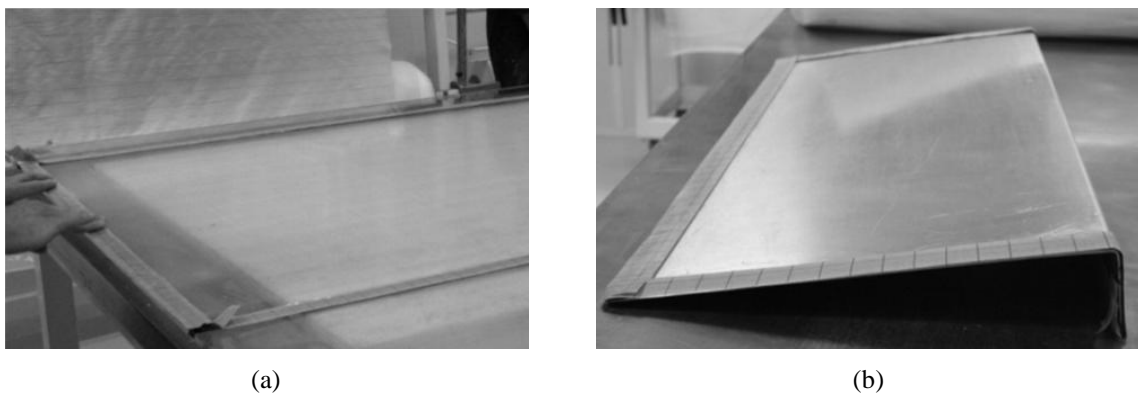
Detail of sealant tape applied to the mold: (a) glassy surface used as mold; (b) metallic profile used as mold.
